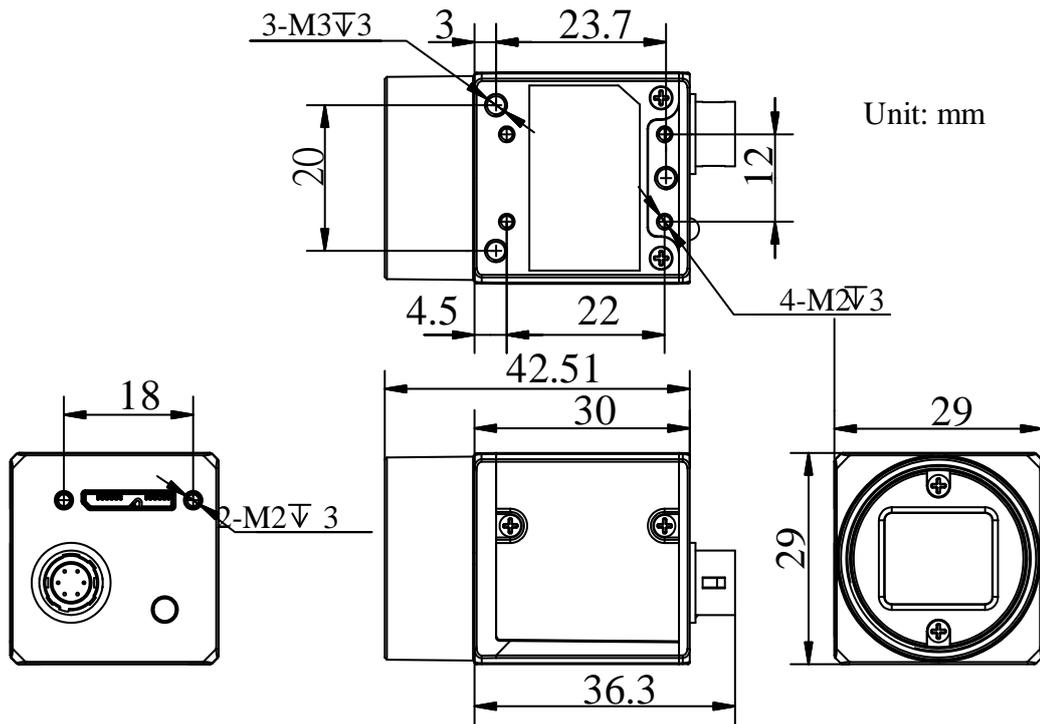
Dimension of MV-CA013-20UM/UC and MV-CA050-20UM/UC
